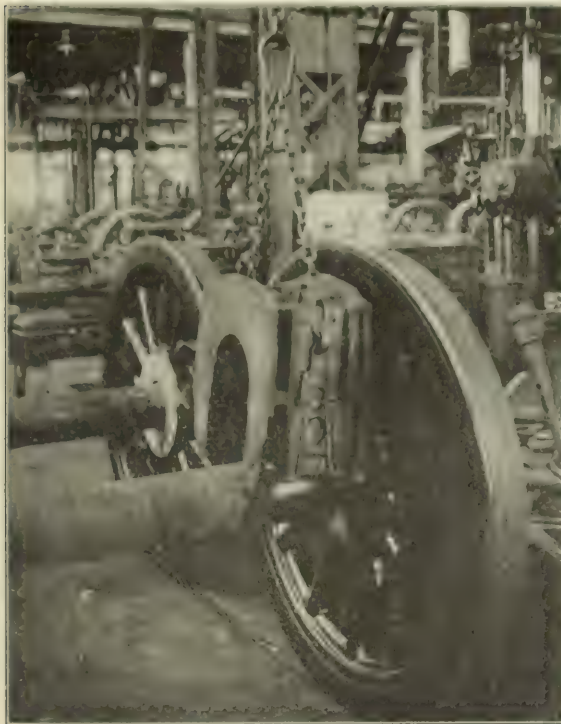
Expanding Wedge Device Used in Handling Driving Boxes.
